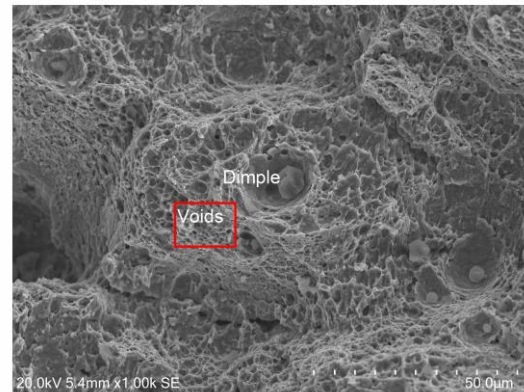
Fractured surfaces of the Charpy test specimen
